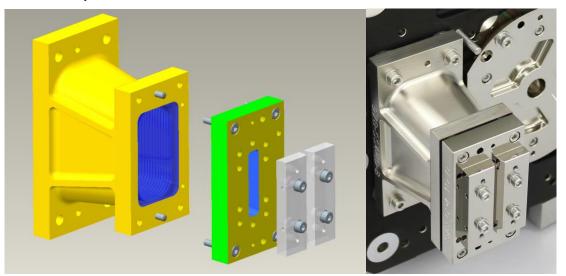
Exploded view (left) and image of the slit assembly mounted to the TMA (right).
